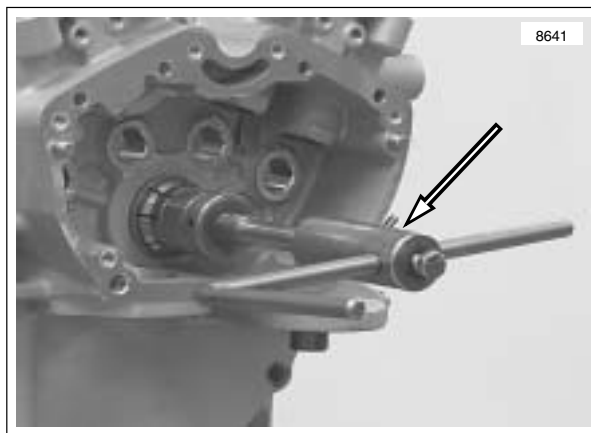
Lapping Pinion Shaft Bearing Outer Race with Crankcase Main Bearing Lapping Tool (Part No. HD-96710-40B)
